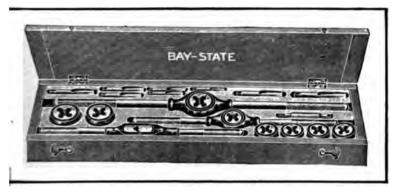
Showing Holder Designs for One and Two Piece Thread Dies.
